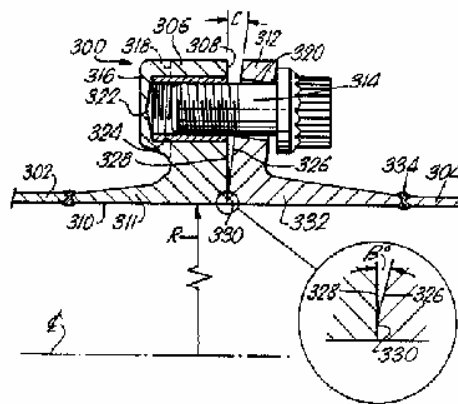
Fluid-Tight Joint With Inclined Flange Face, US Patent 5,230,540
